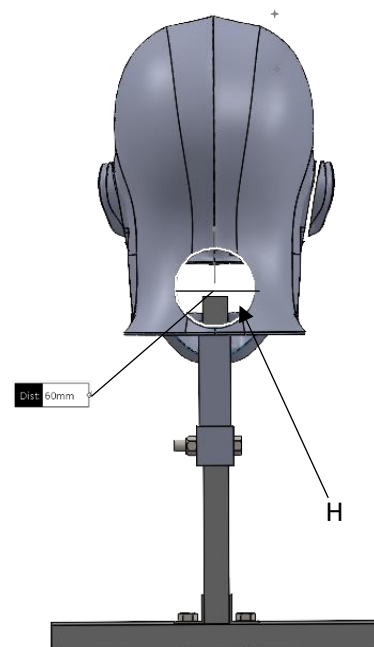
Back view of the mannequin head, showing pipe connection path (with diameter).
